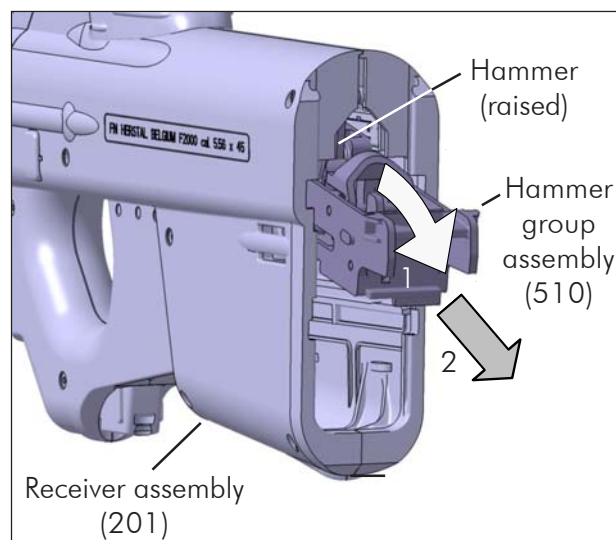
s - Inclining the hammer group assembly (510) downwards
